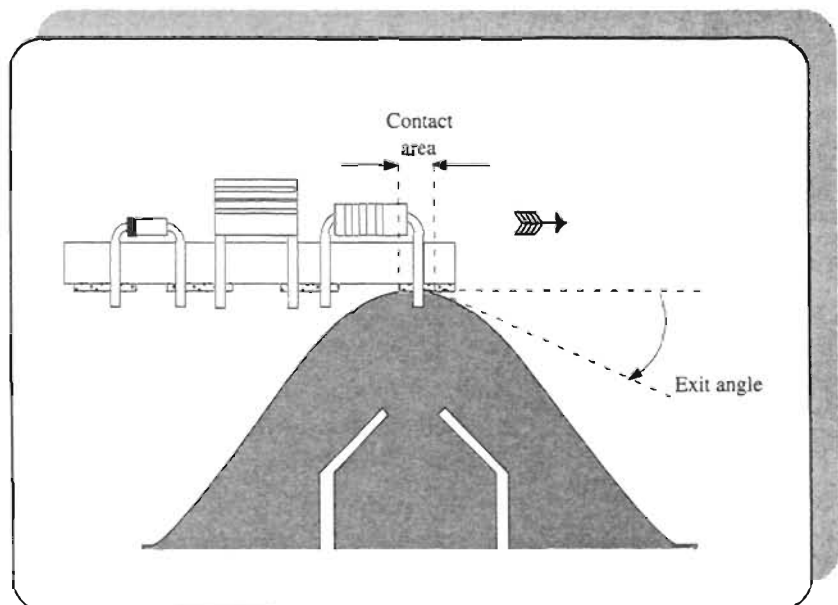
Symmetrical, or basic double-sided solder wave
